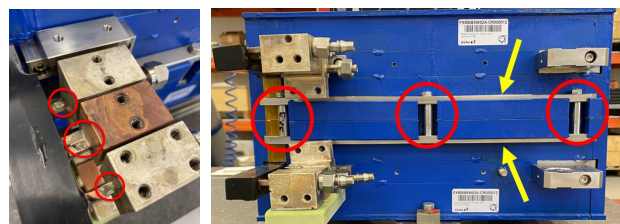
Left: Water block flame brazed joints. Right: Yoke side view with mechanical assembly stoppers and load distribution bars (yellow arrow).
